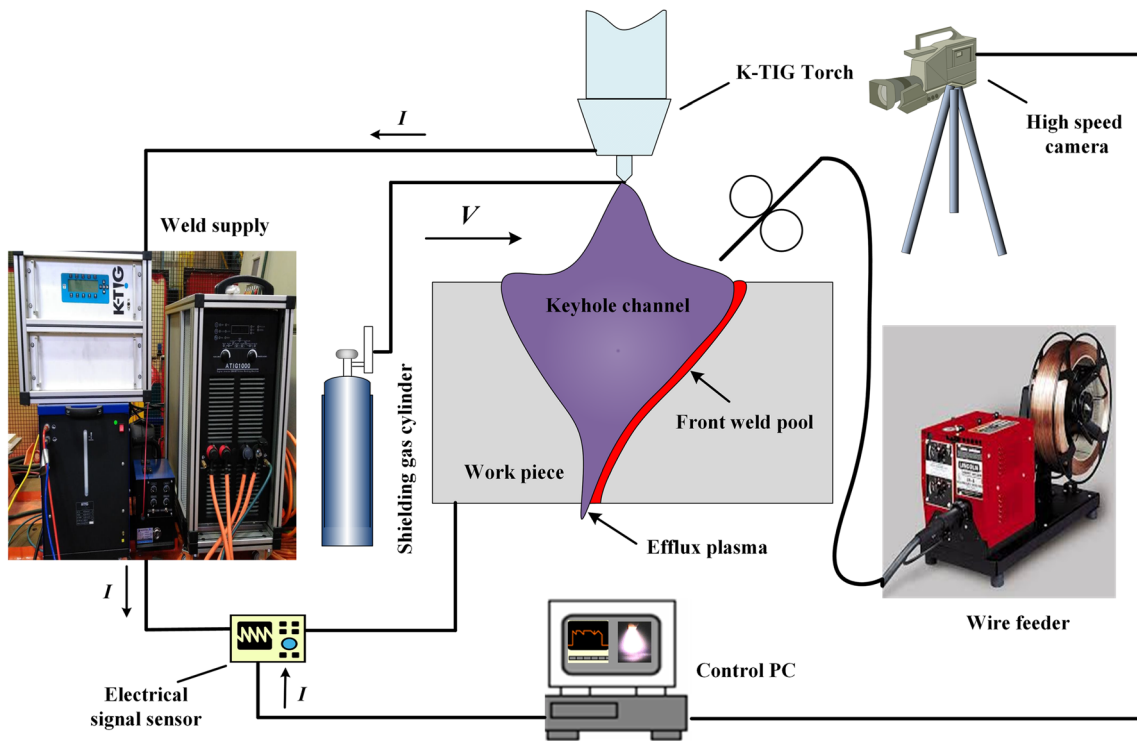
Schematic of K-TIG welding system with filler wire
